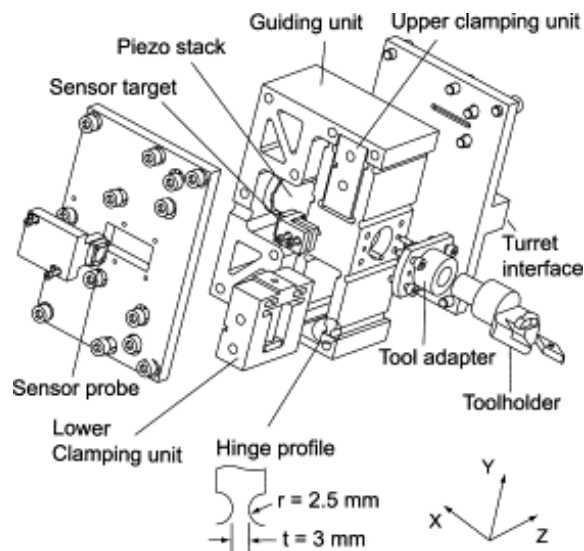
Schematic of improved FTS with clamping unit [80]
